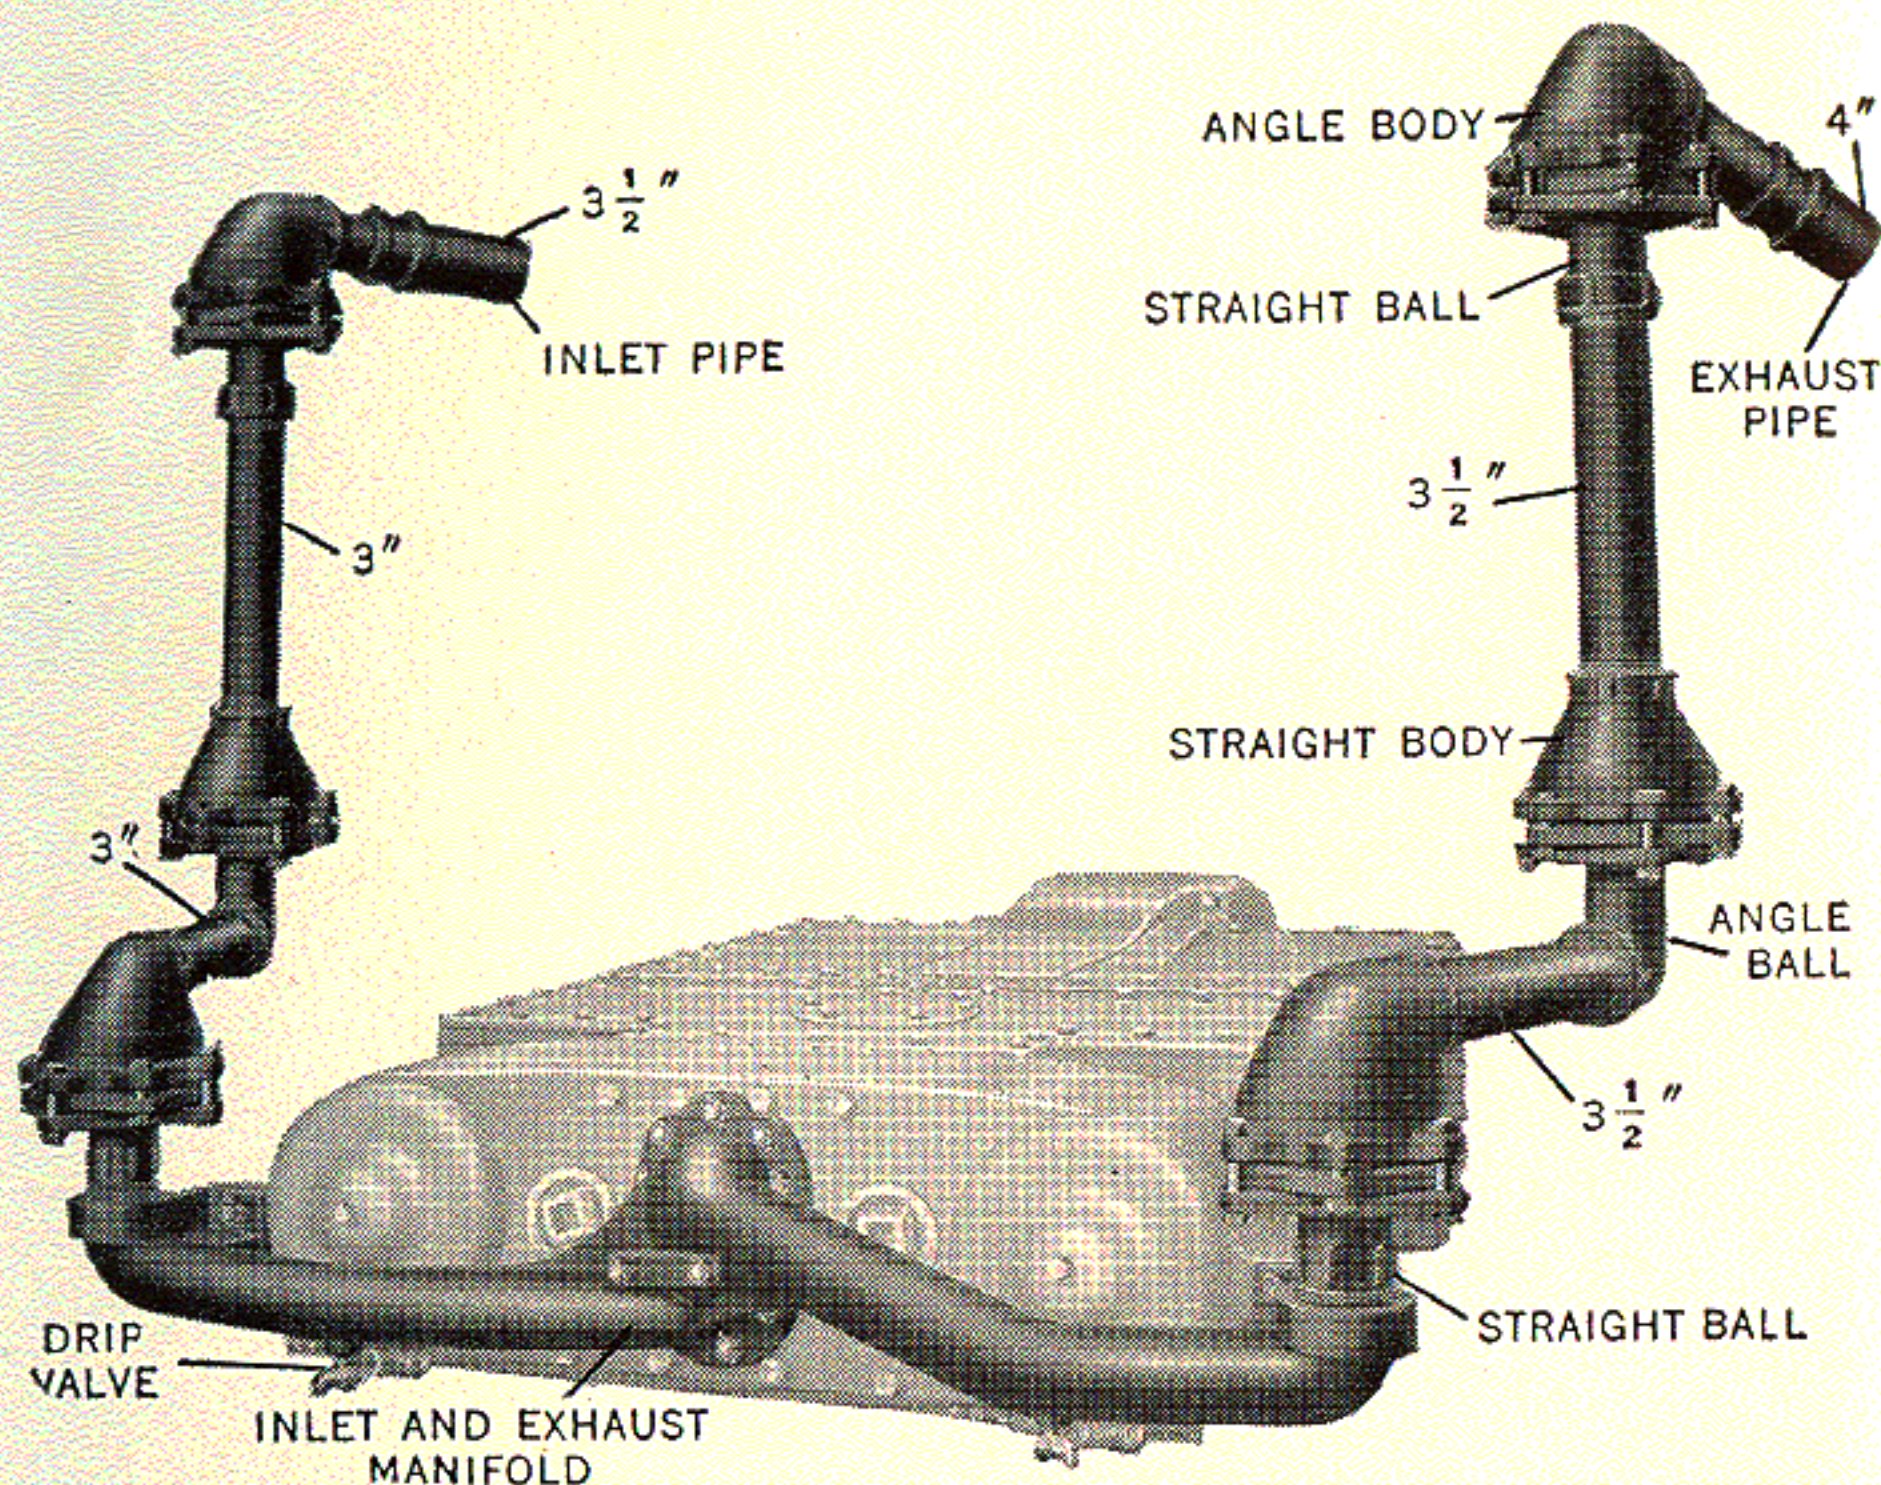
Type C-1 Booster Steam Inlet and Exhaust Joints, Manifold and Piping
